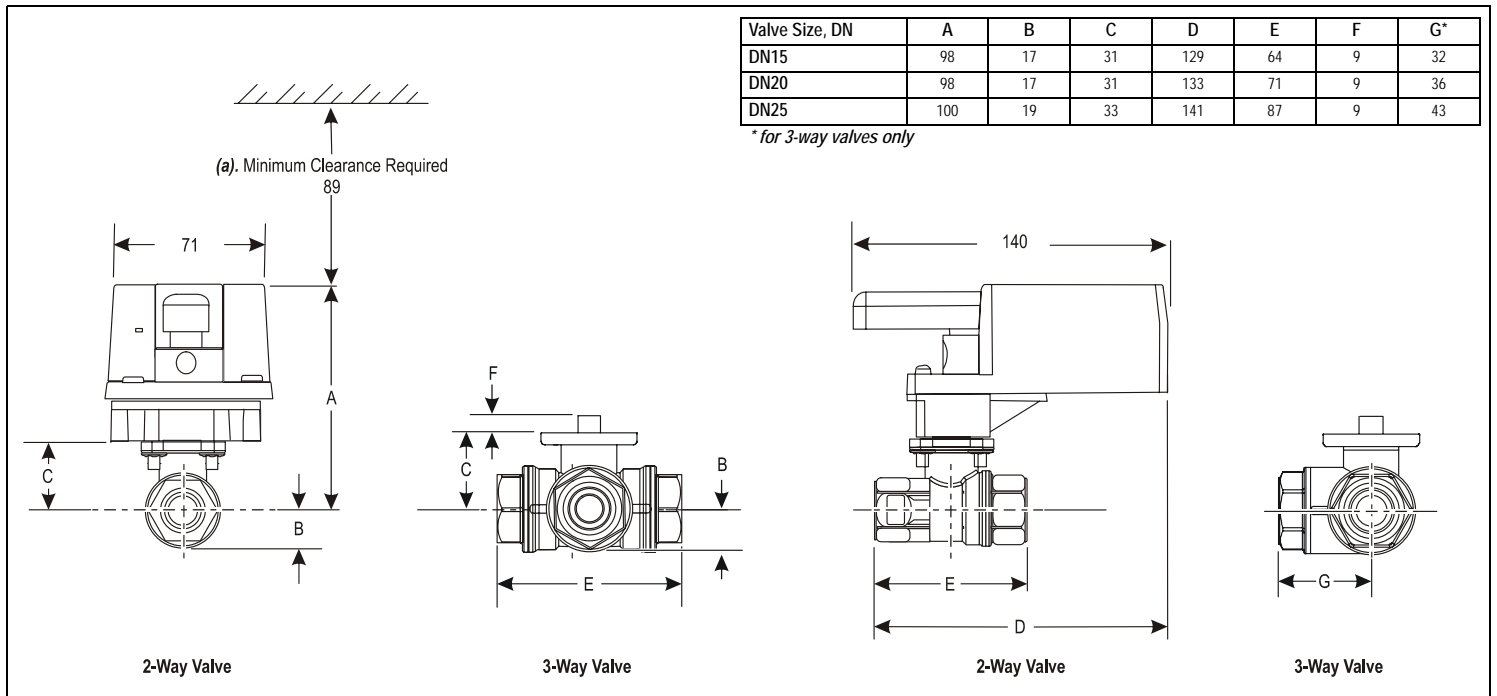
Non-Spring Return VA9104 Actuated VG1000 Series Ball Valve Linkage Dimensions in mm
